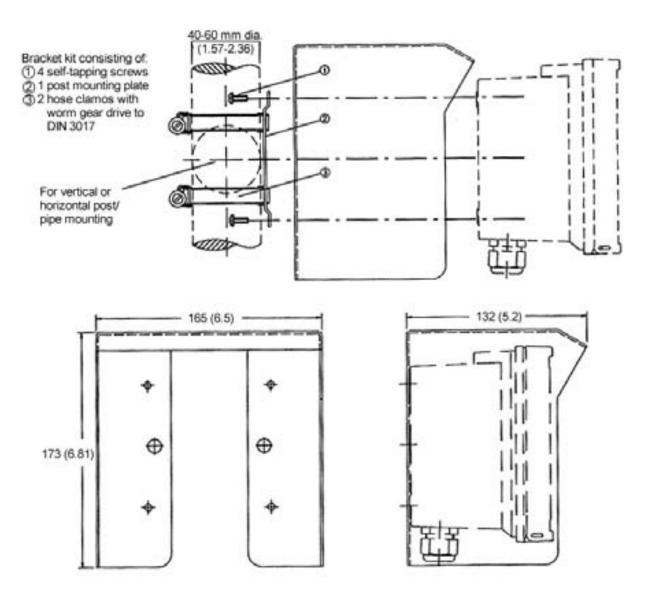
Dimension Drawing for APT4000 with Wall or Pipe Mounting
